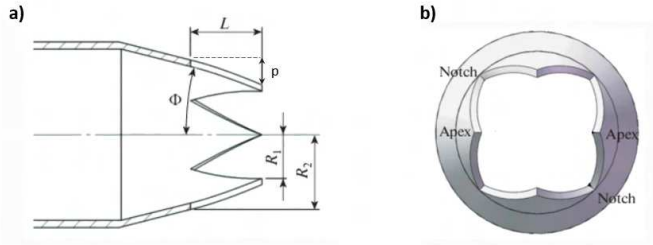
Chevron nozzle geometrical parameters: cross-section (a) and rear view (b) .
